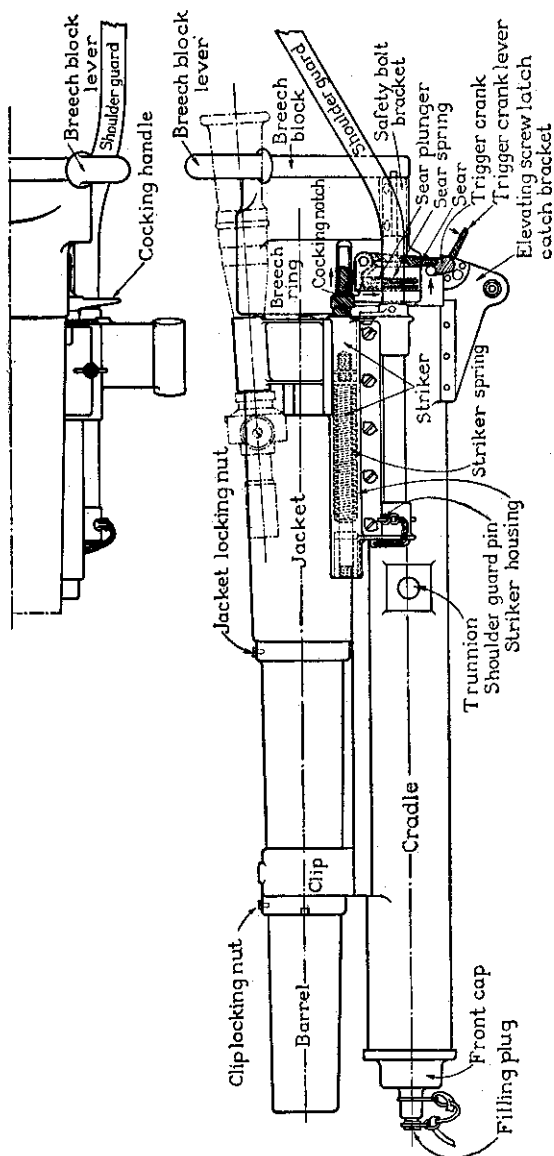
Elevation, side view of gun and cradle, 37-mm gun
